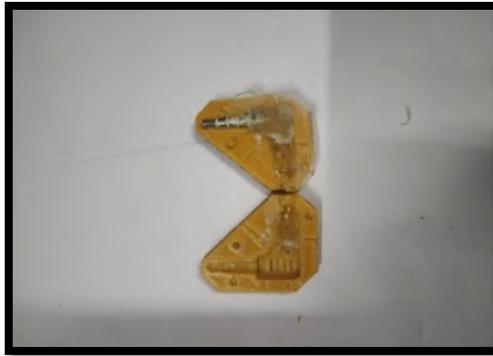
Opening The 3D printed Mould after 5 minutes of cooling
